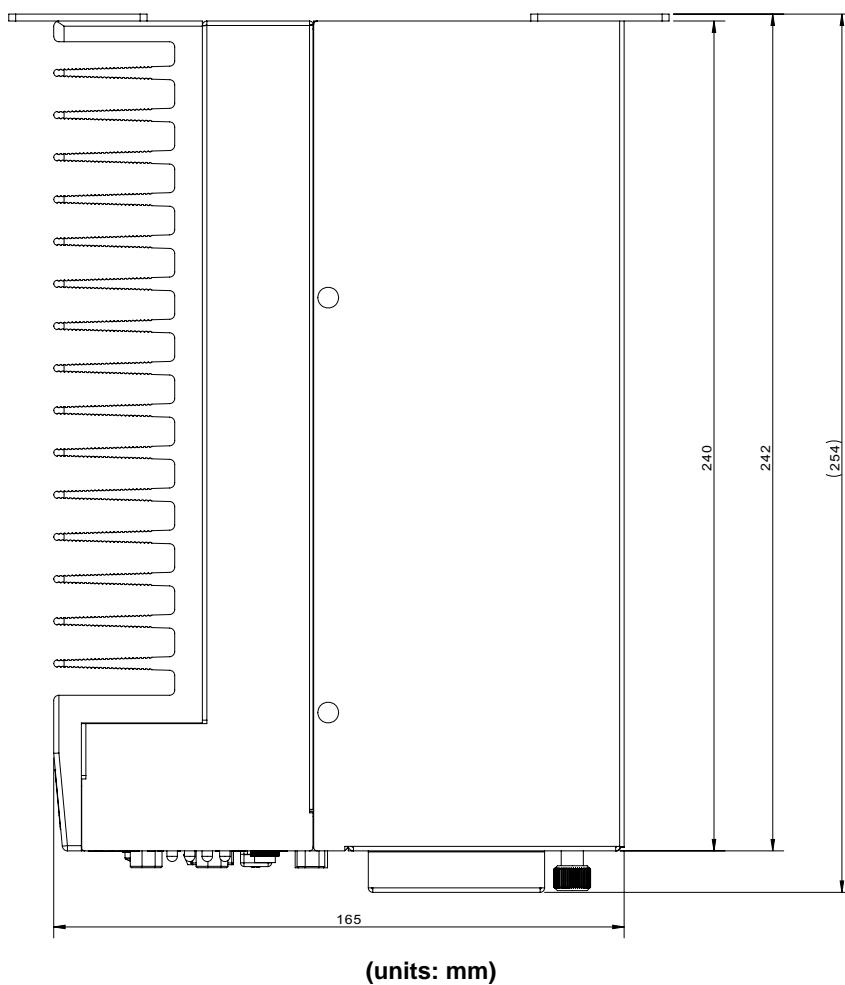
MXC-6620/6640 Top View (with wall-mount brackets)
